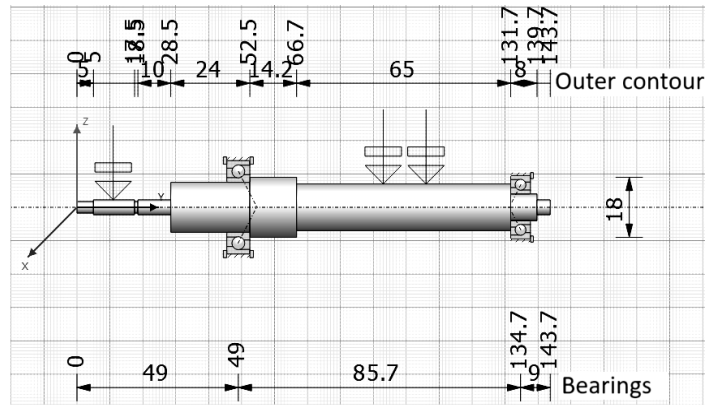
Centrifuge shaft drawing in the KISSsoft software package
